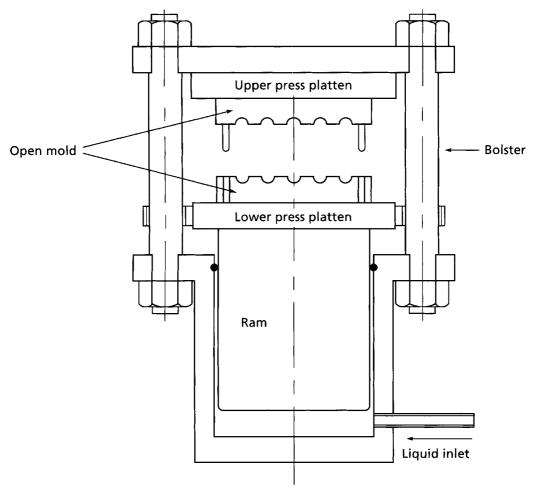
A basic press for compression and transfer molding (courtesy of the Holz Rubber Company)
